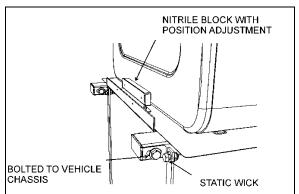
FUEL TANK SUPPORT MOUNTING BOLTS
